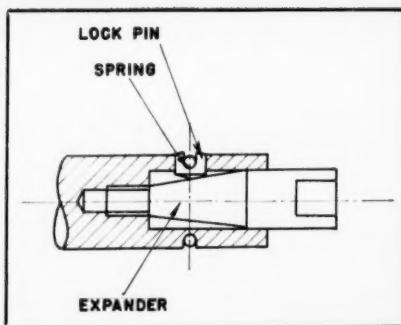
This sketch shows a modification of the fixture shown in Fig. 2.
